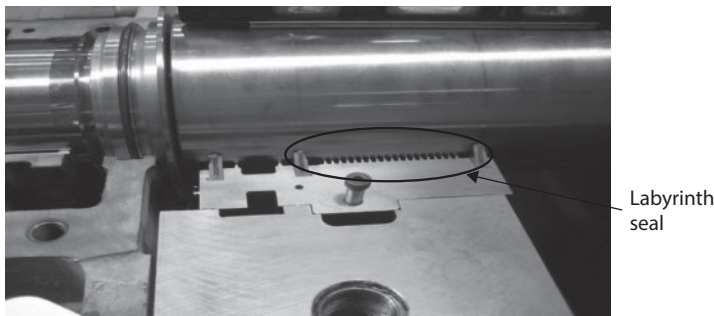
Labyrinth seal mounted on the housing sealing on the shaft. (Courtesy of Elliott Group)
